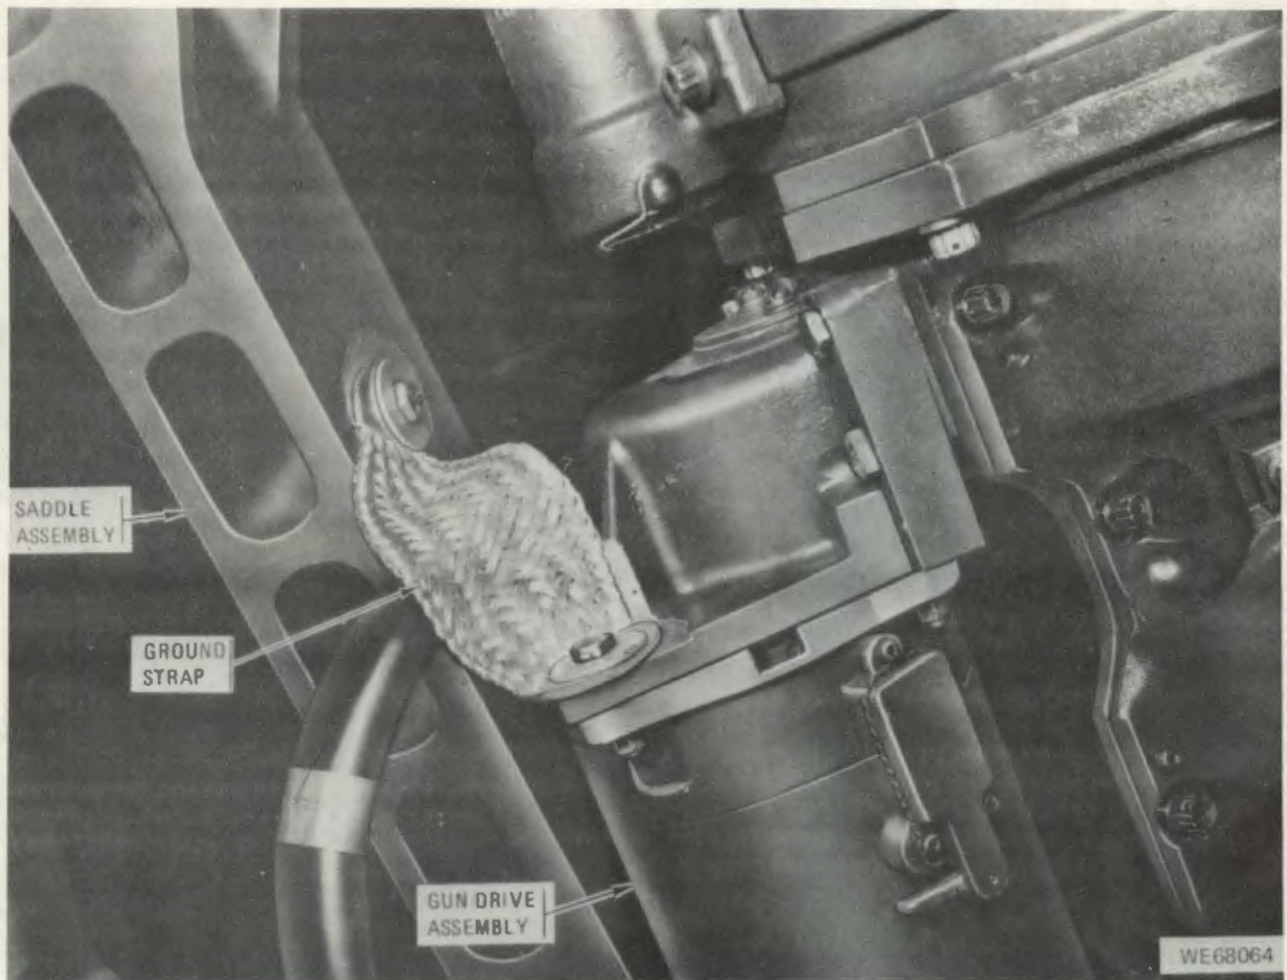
Ground strap between saddle assembly and gun drive assembly.
